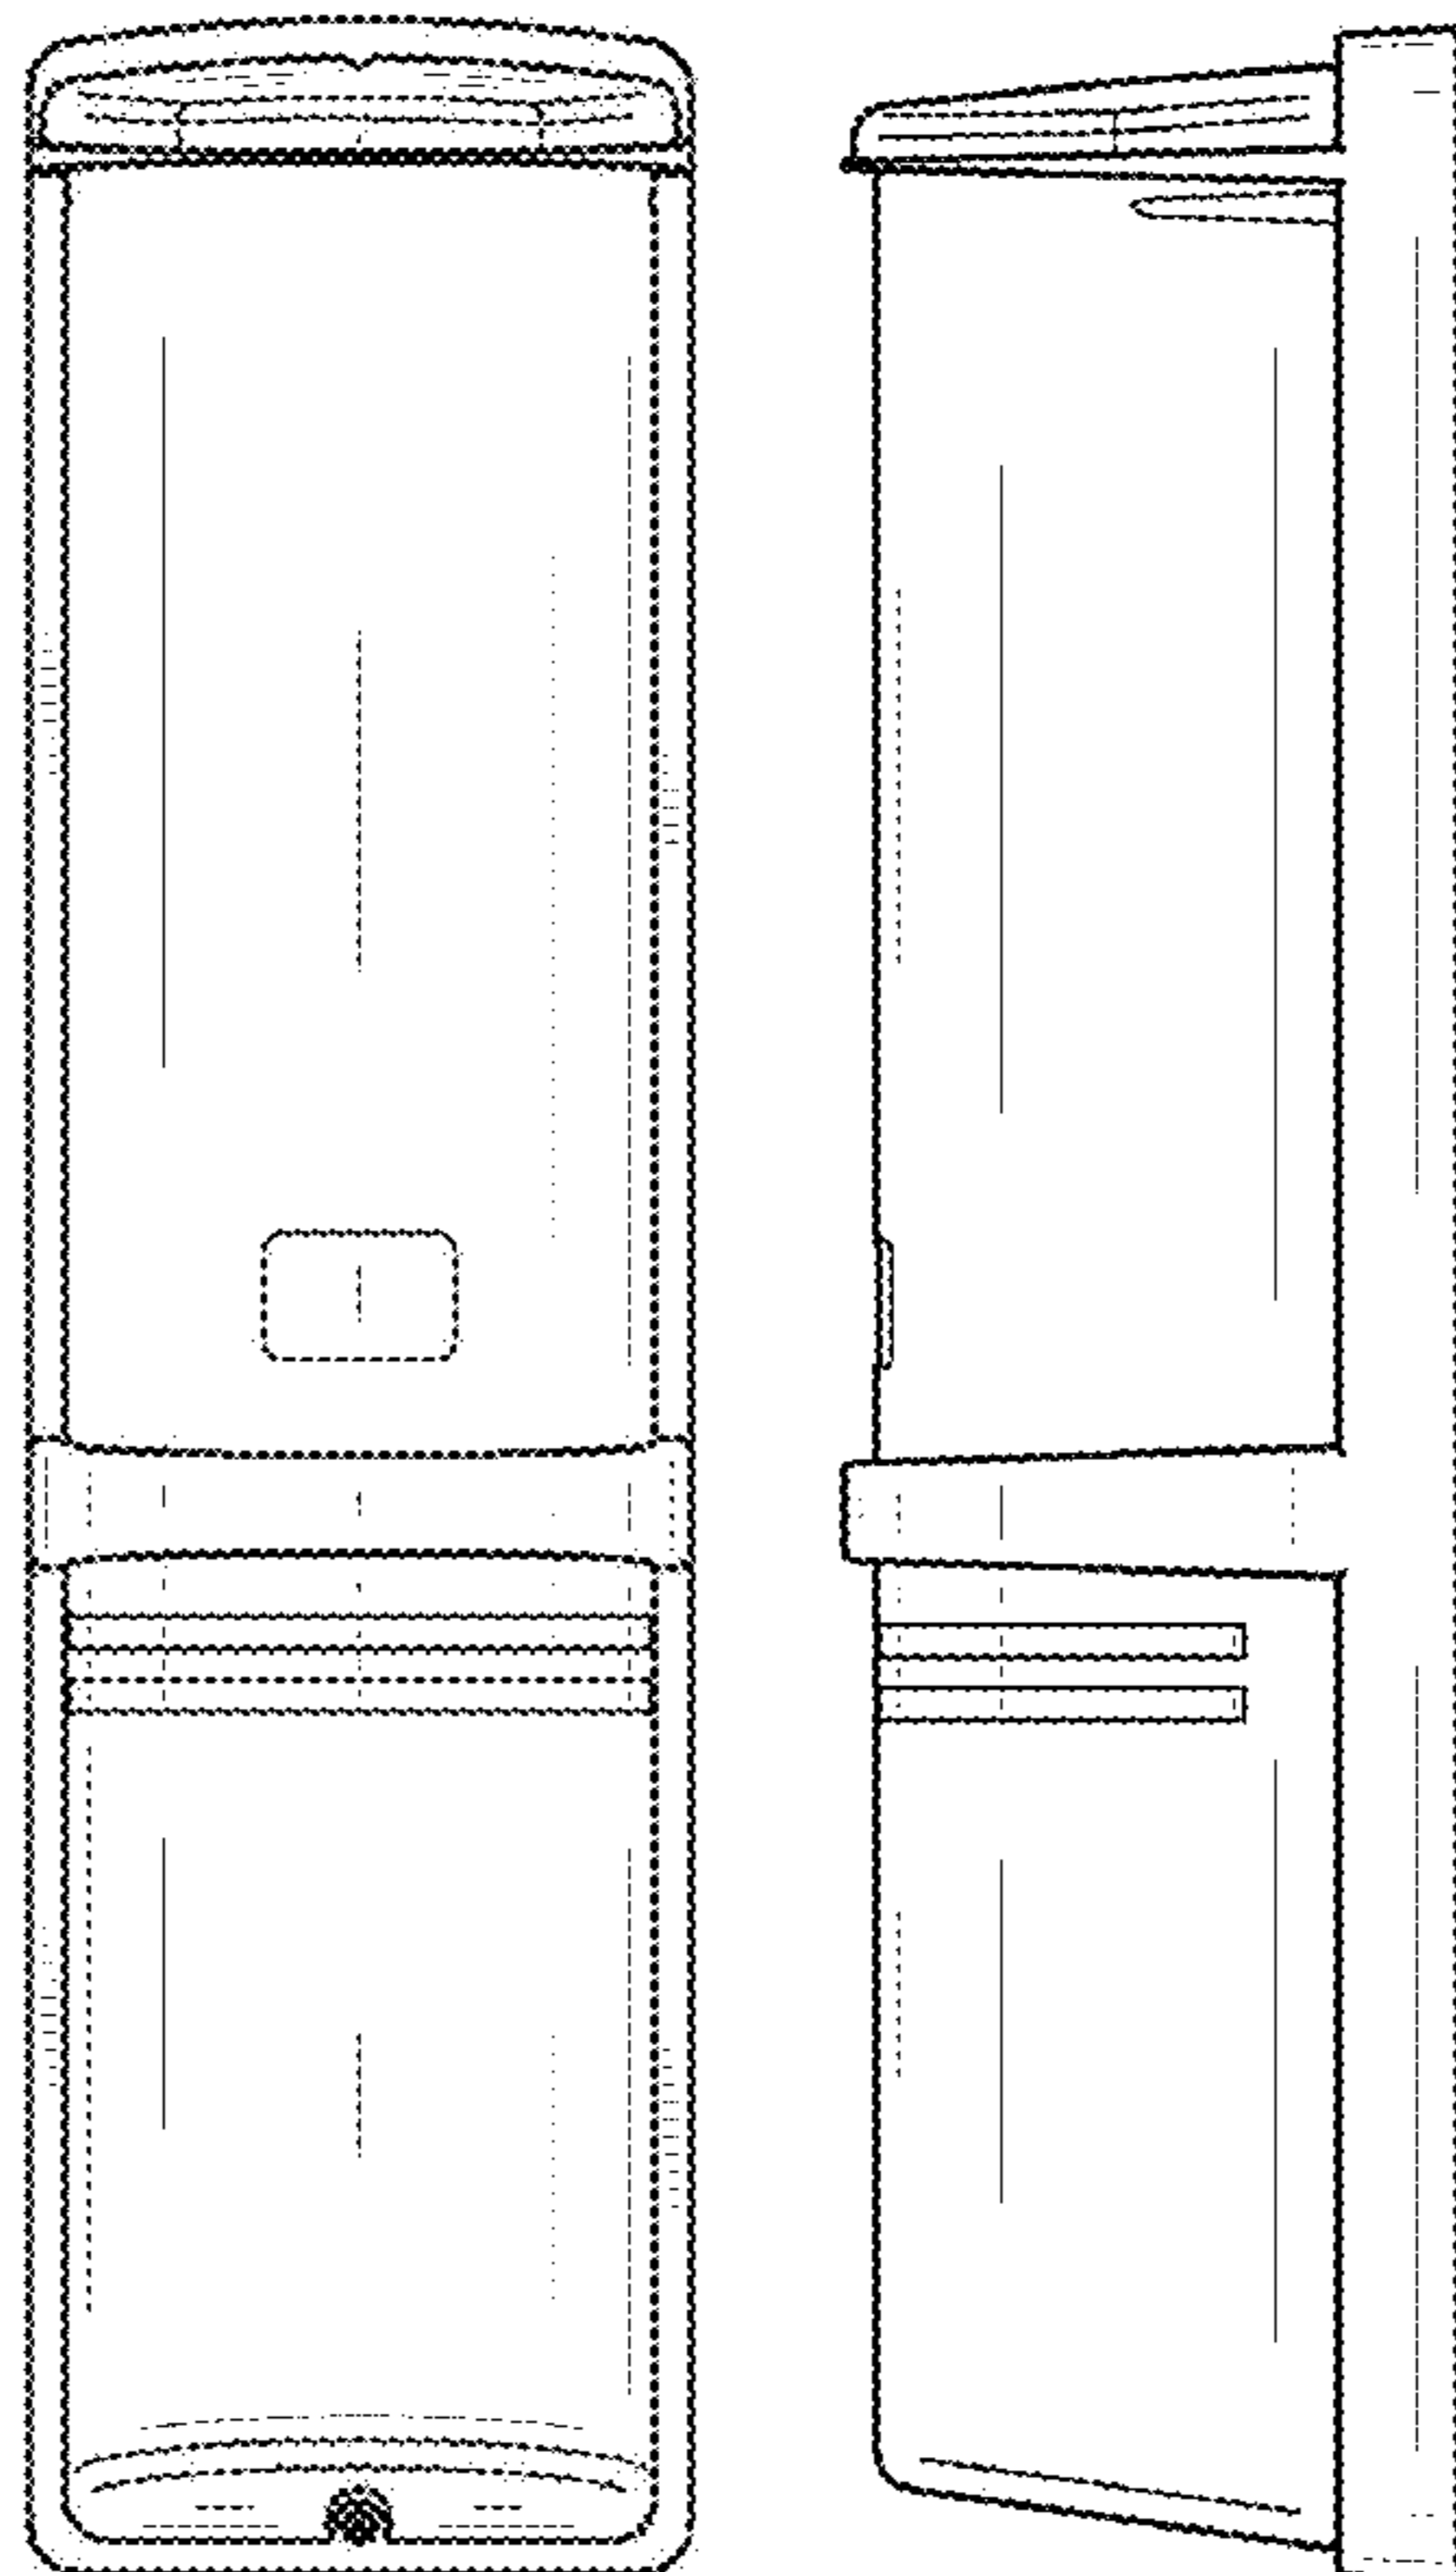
is a left side elevational view of the sensor of FIG. 1;
